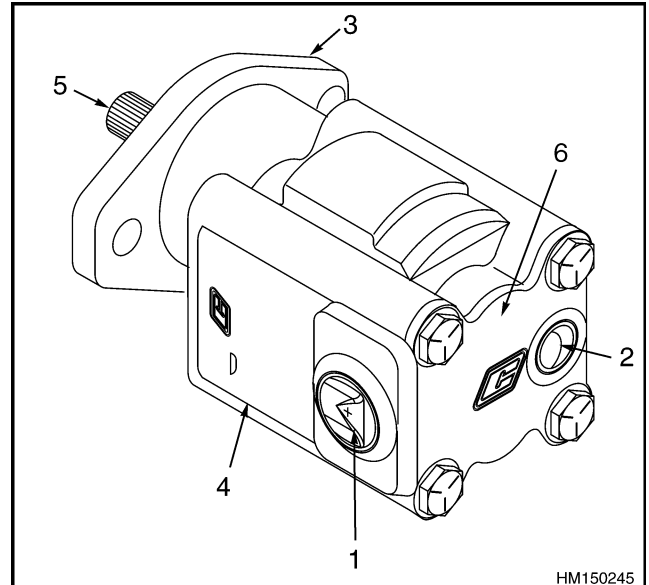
Hydraulic Pump GLP/GDP 3.5-5.5LJ/MJ (GP/GLP/GDP70-120LJ/MJ)
